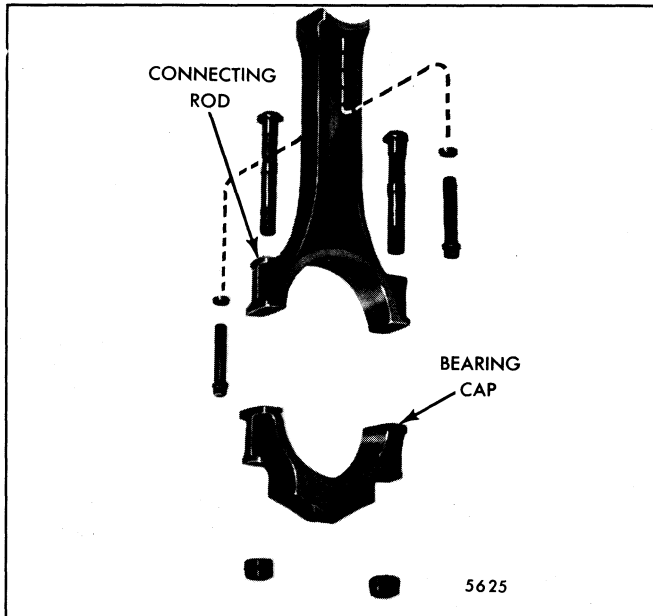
Connecting Rod Details and Relative Location of Parts
